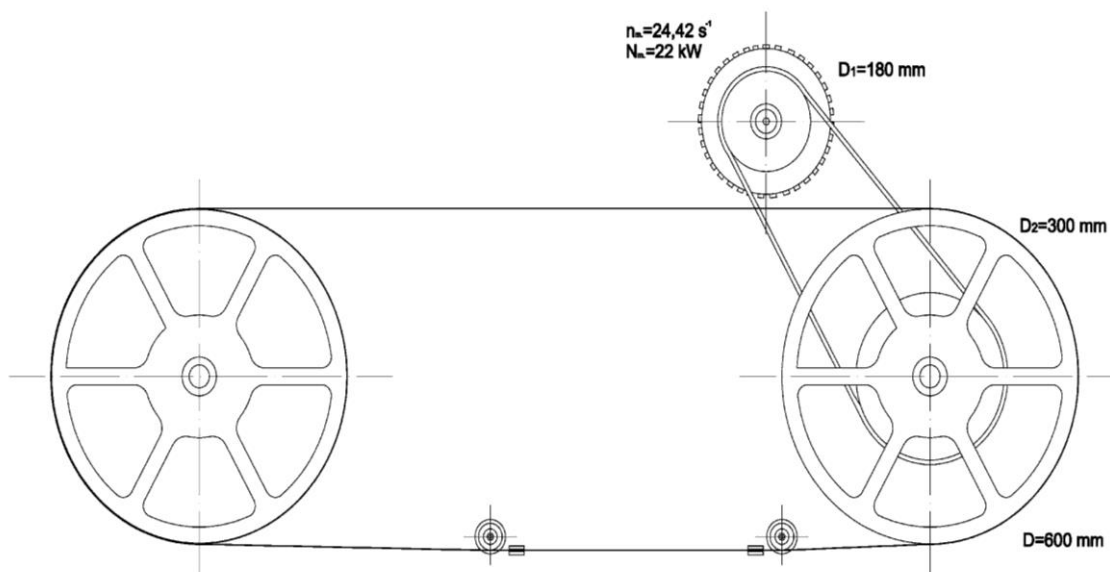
Cutting mechanism – „Wood-Mizer“, Model WM 3000
